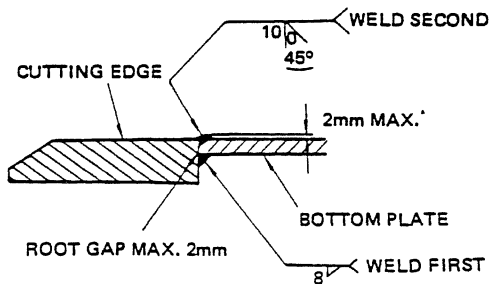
Weld Build-up on Cutting Edge and Bottom Plate (Skidless Part)
